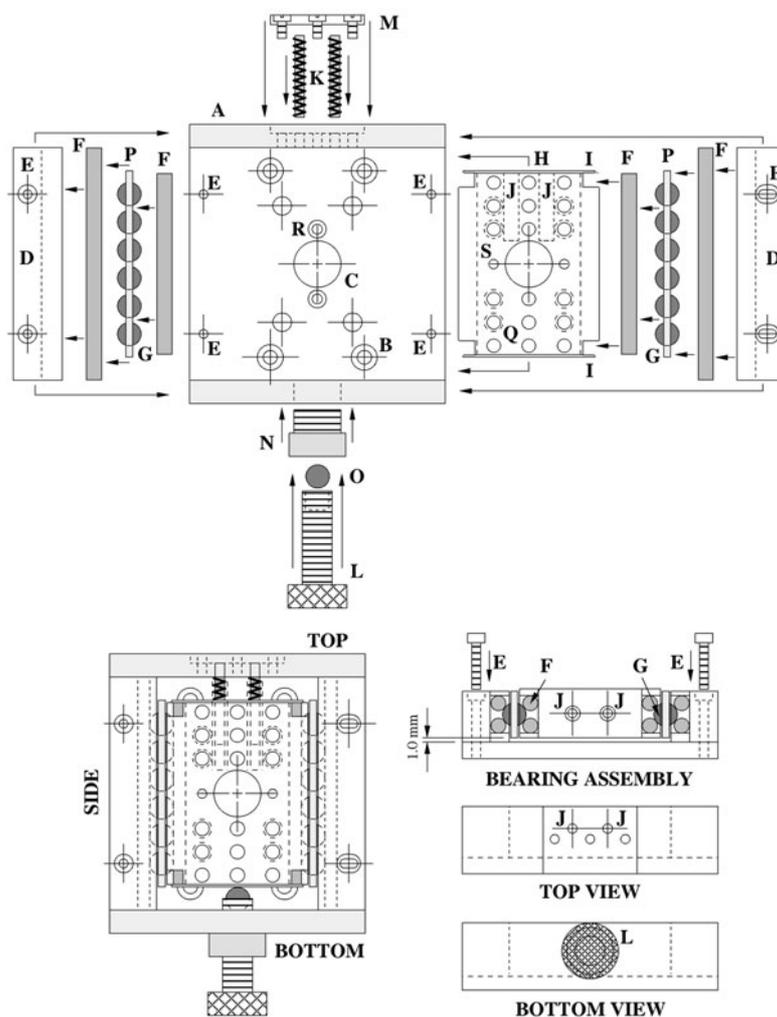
The translator detailing the individual components (A–S) as an exploded view, and showing the full assembly, bearing assembly and top and bottom view. For details, see text.
